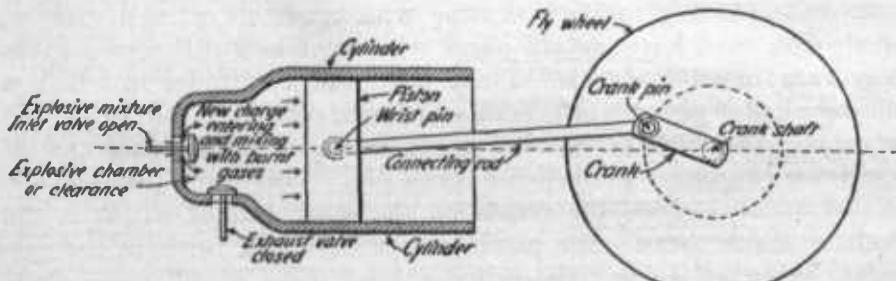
Diagram showing mechanism of internal combustion engine—suction stroke.
